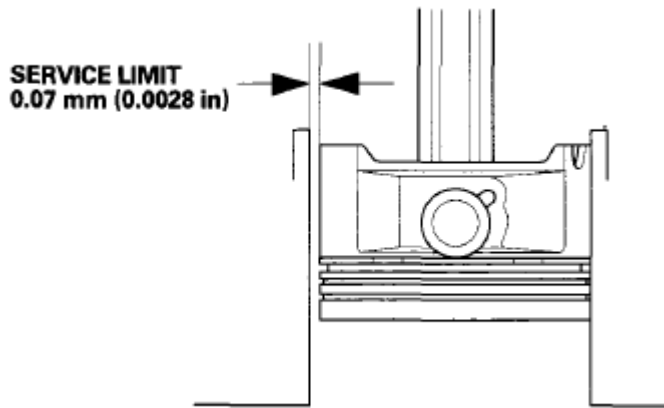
Checking Piston-To-Cylinder Bore Clearance
